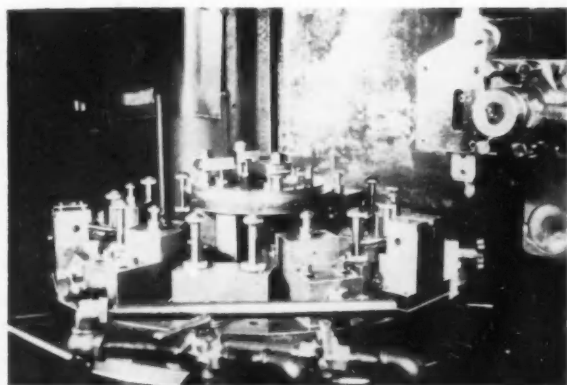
Fixture on 36-in. Bullard vertical turret lathe for roughing outer contour of compressor disc.
